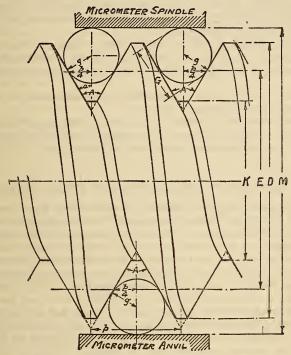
Three-wire method of measuring pitch diameter of thread plug gages
